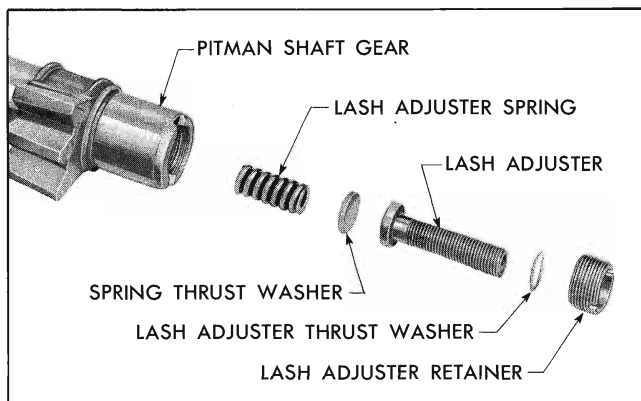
A-13 Parts in End of Pitman Shaft Gear
